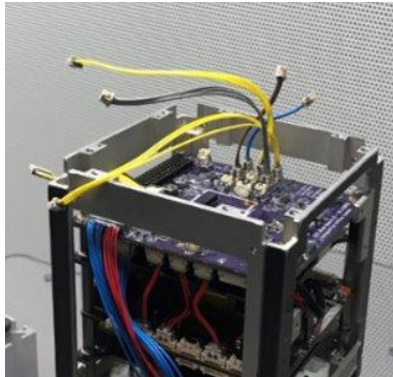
Image taken during integration helped to resolve a cable problem later in testing
